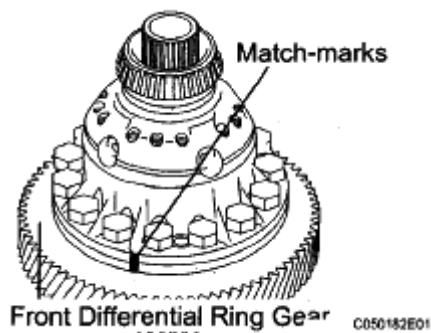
Identifying Match-Marks On Ring Gear And Differential Case
